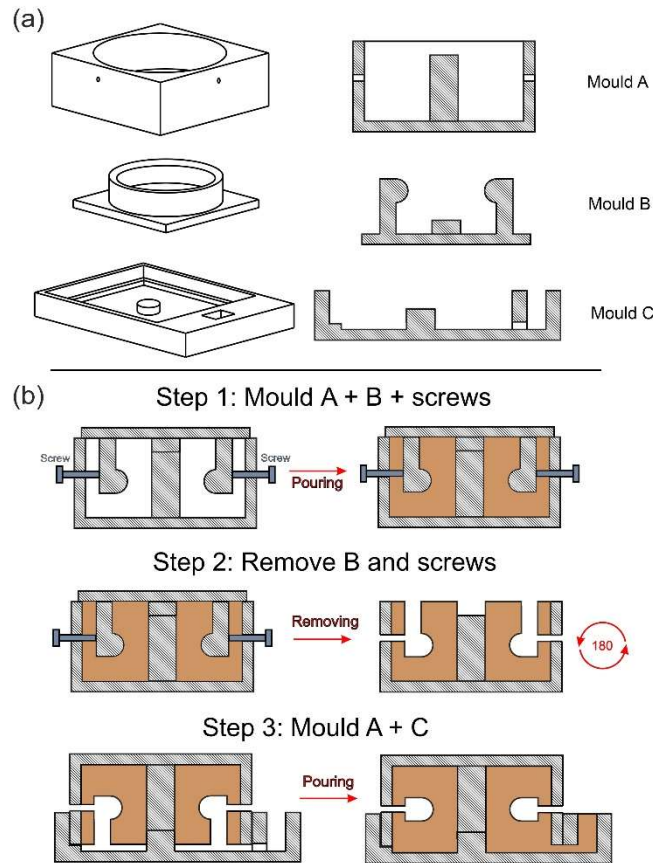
(a) Molds for producing the soft robotic pincher and (b) the steps of the molding process.
